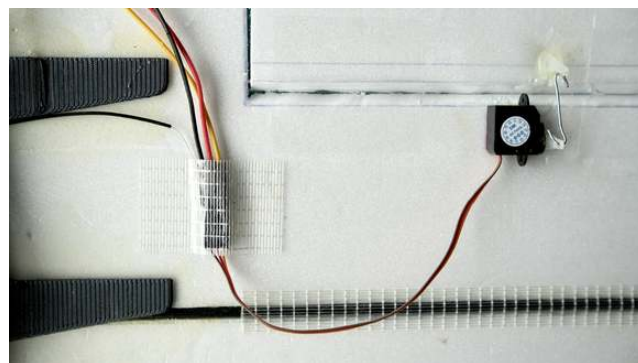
Aileron installation detail, showing the wing-mounted servo, pushrod linkage, hinge line, and tape reinforcement.
